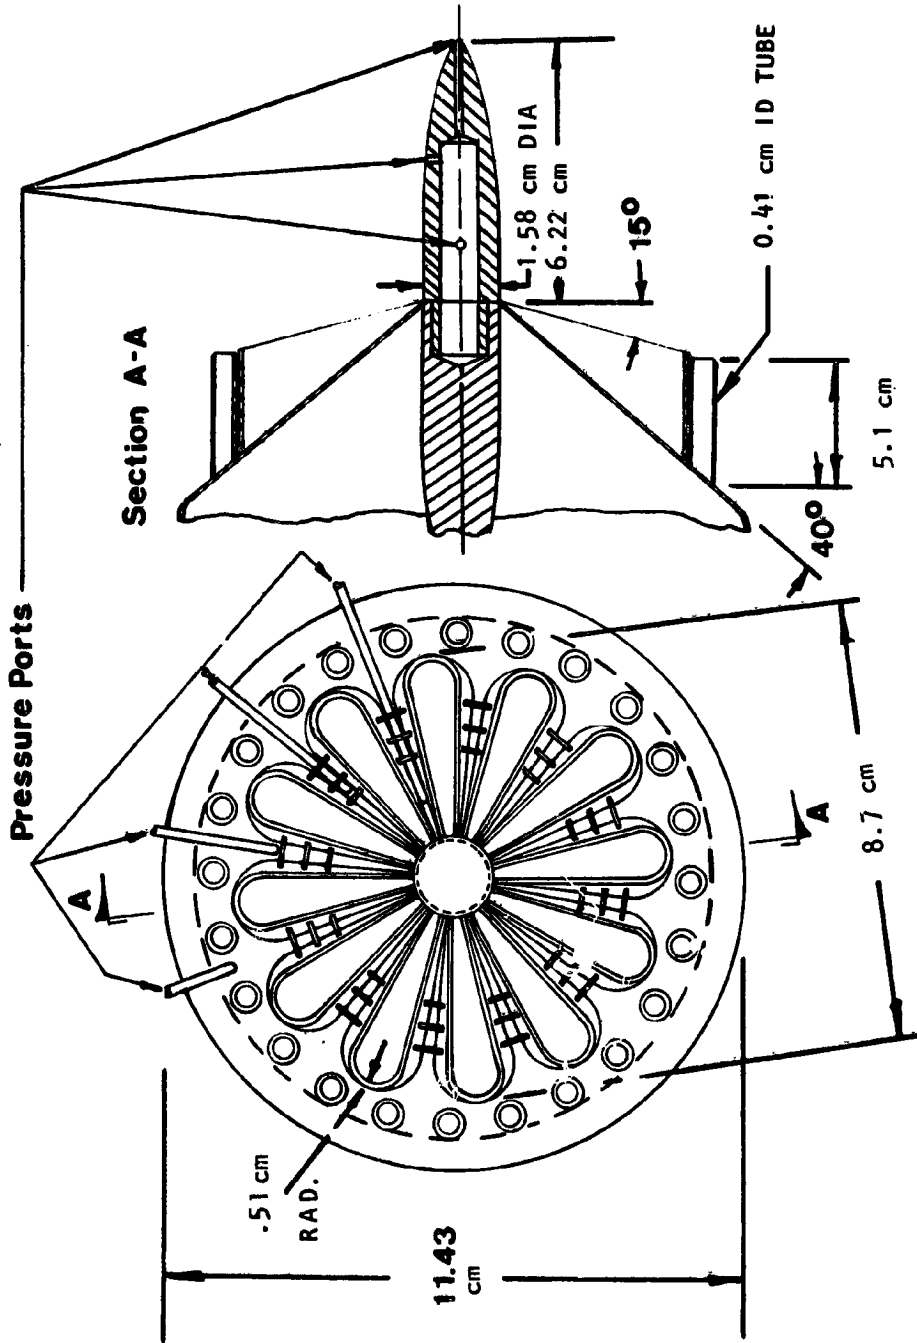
A cross-sectional view of the daisy lobe nozzle.
